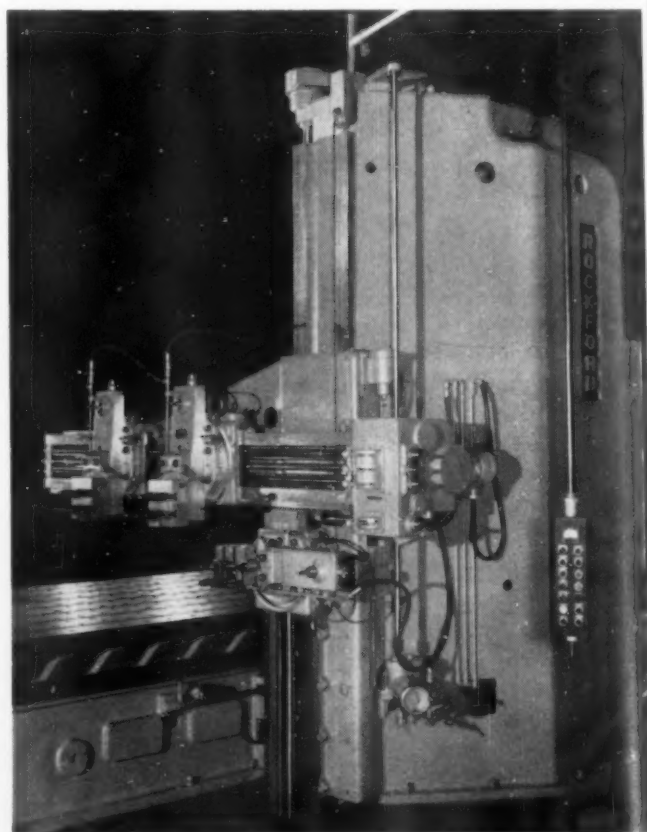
Incorporating a double-acting and a single-acting cylinder in the drive circuit gives this Rockford hydraulic planer three ranges of table speed.
